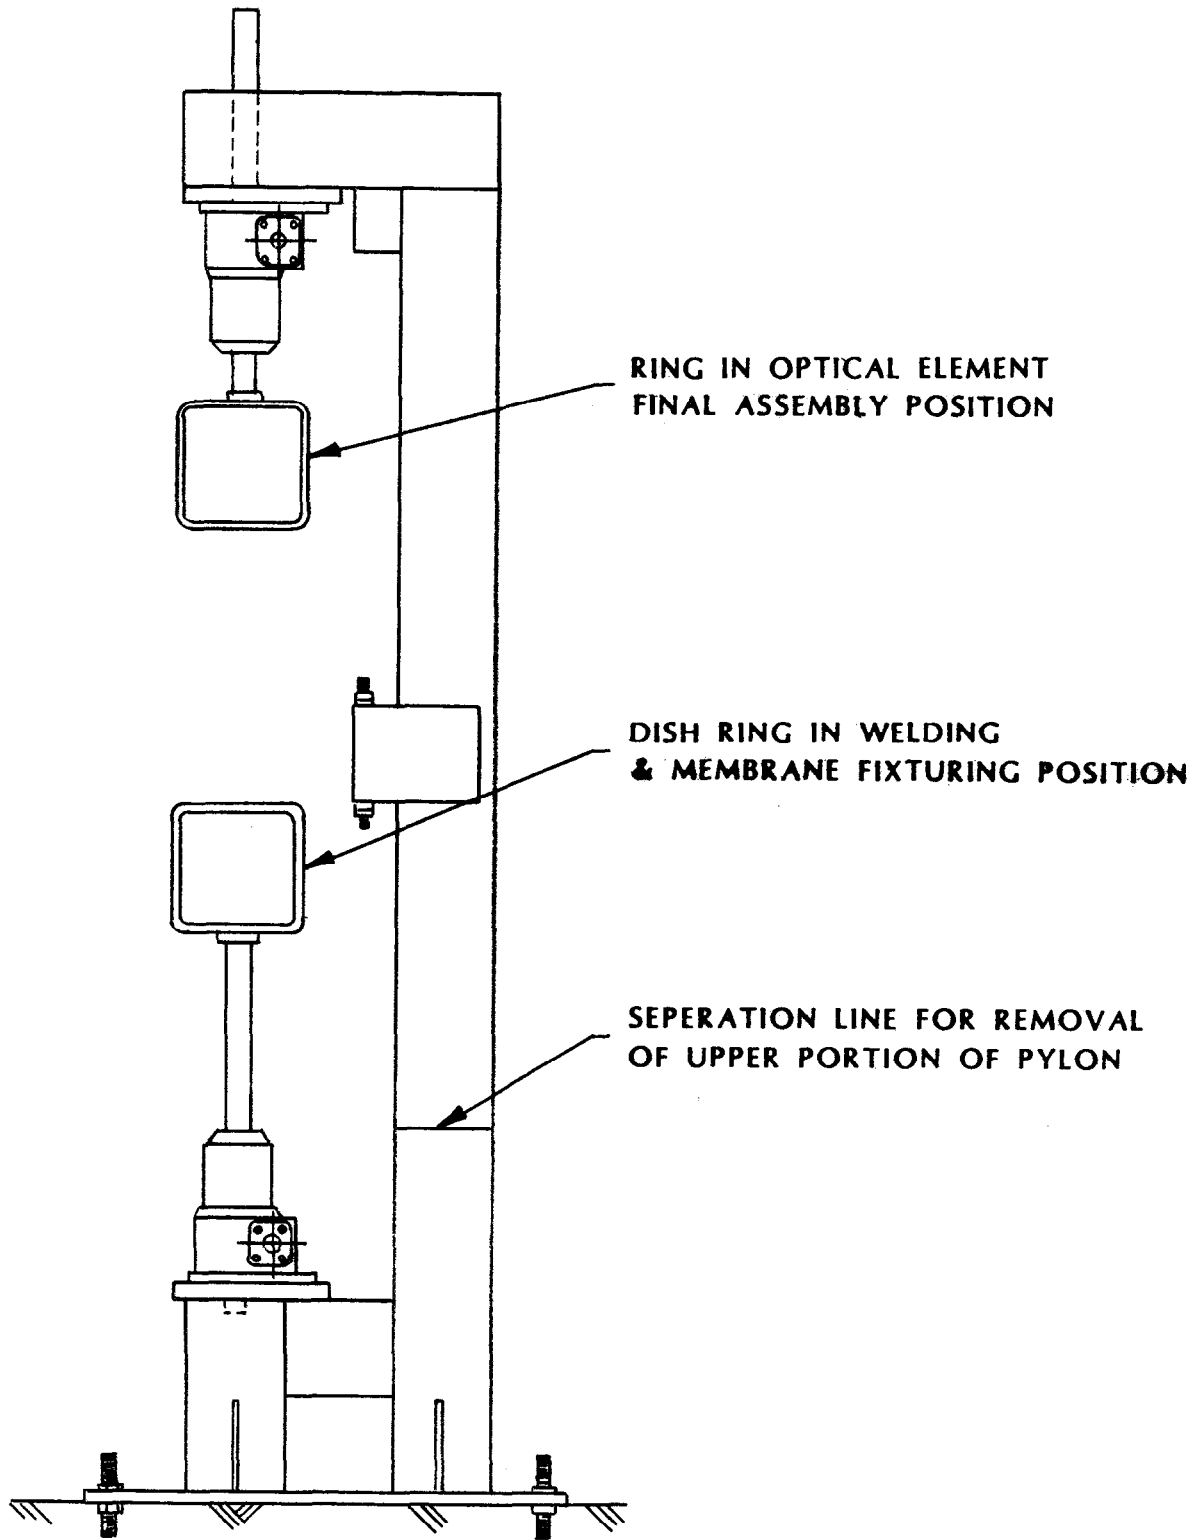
Optical Element Assembly Tooling Utilizing Heliostat Membrane Tensioning Ring Support Pylon.
